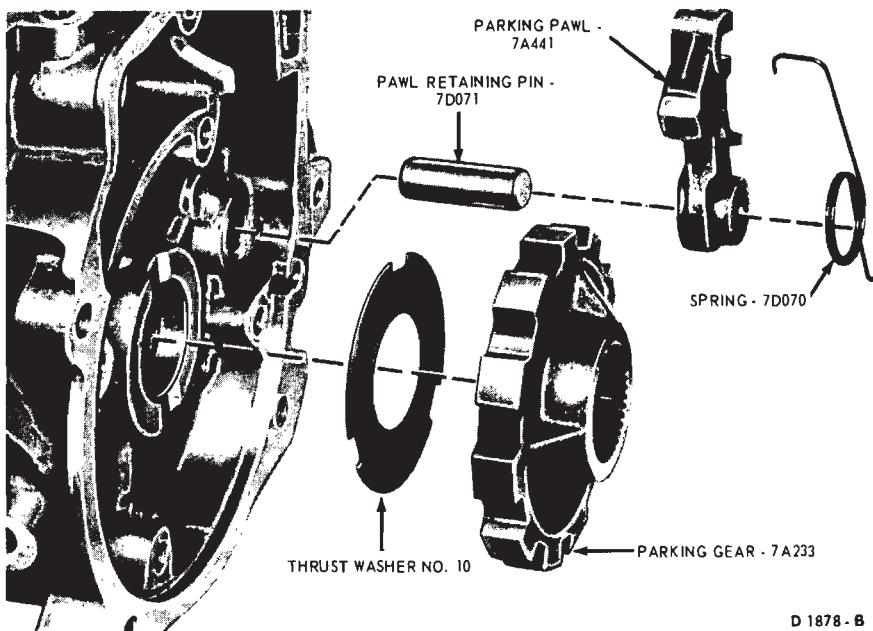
Parking Pawl, Return Spring Retaining Pin and Gear
